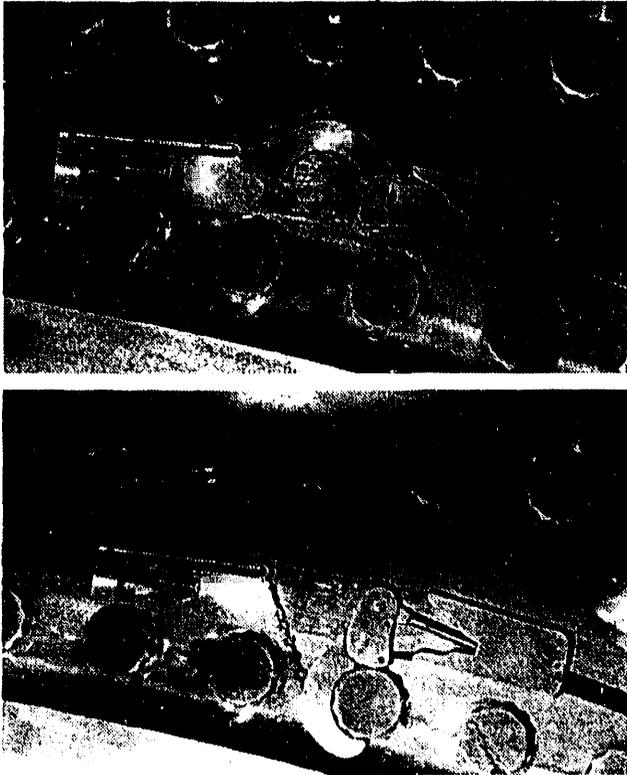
7/8-in. inner row bolt tool: jaw retracted for travel in channel (top) and jaw extended to tighten bolt (bottom).
